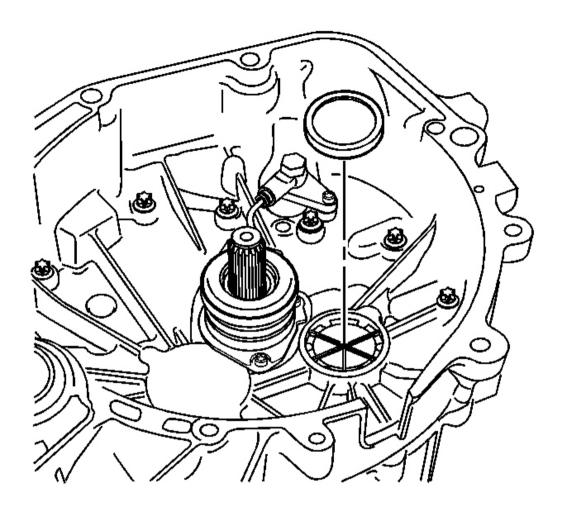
Intermediate Shaft Seal Courtesy of GENERAL MOTORS CORP.
